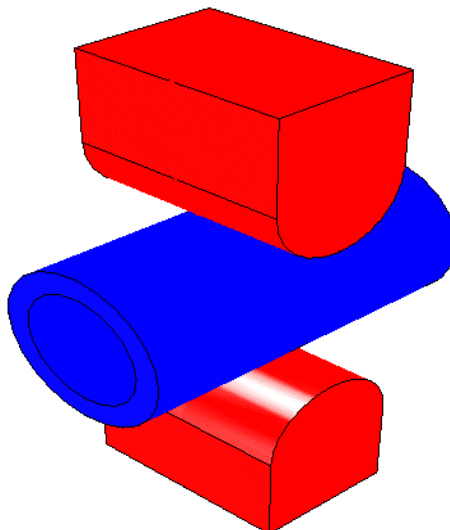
Positioning of the upper and lower cylindrical-shaped dies and the tube
